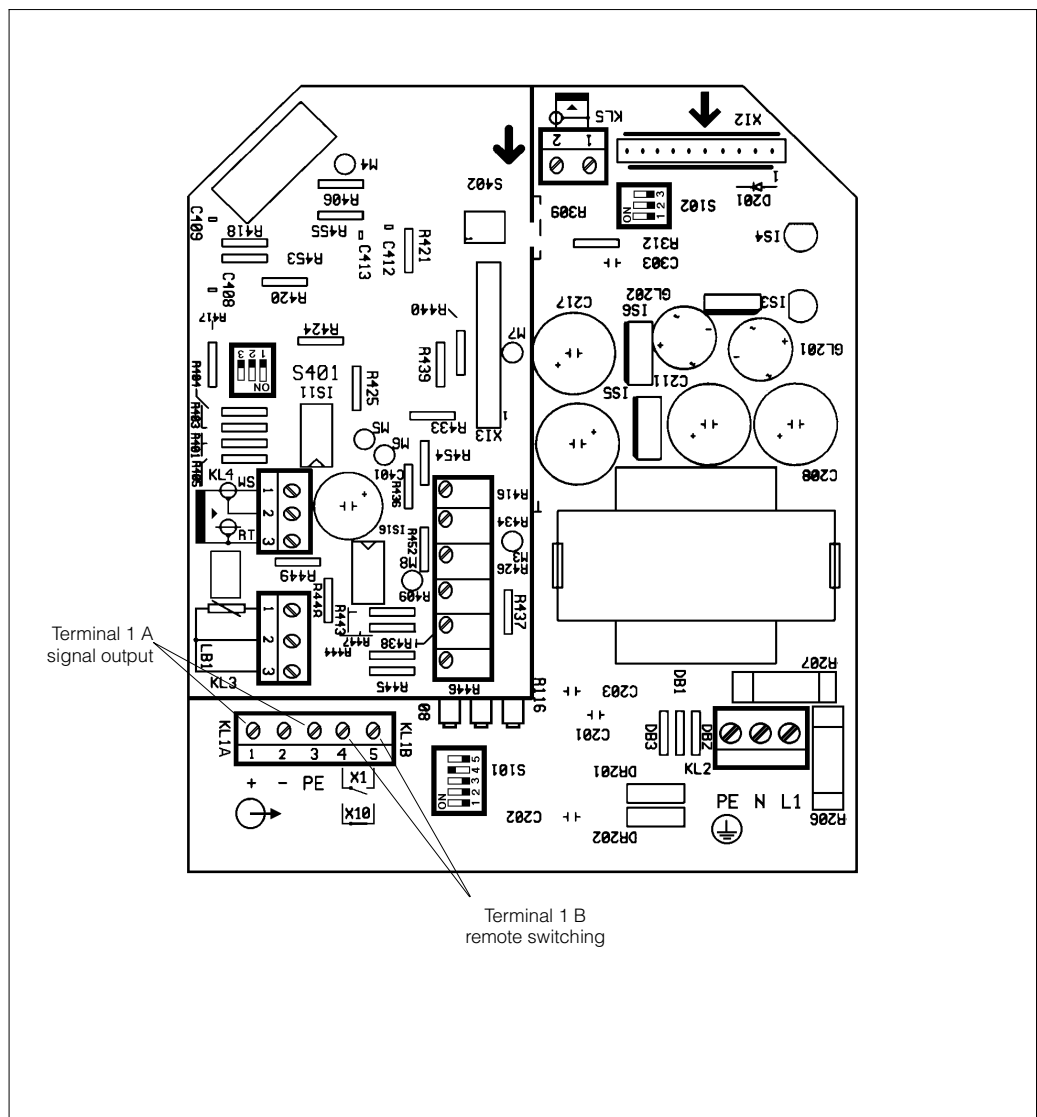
Inside view of Smartec CLD 130 - remote switching connection
